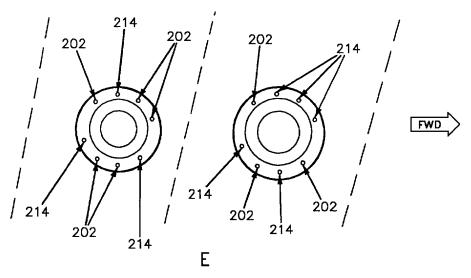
Skin (74A110601) Fasteners (Sheet 4)
